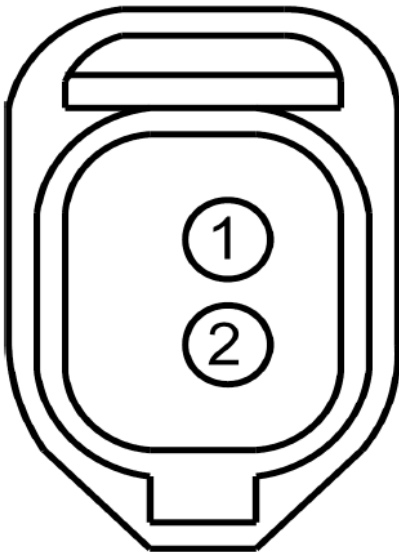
Right Rear Lamp Assembly Connector End View (C417C)
